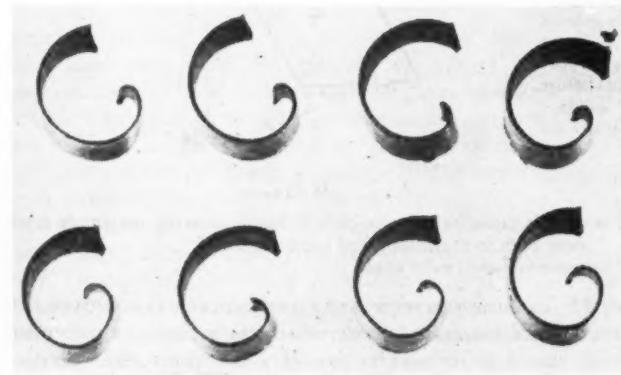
CHIPS REMOVED AT 428 FPM FROM TEST BAR 2 $\frac{1}{2}$ IN. WIDE BY CUTTER SHOWN IN FIG. 10
